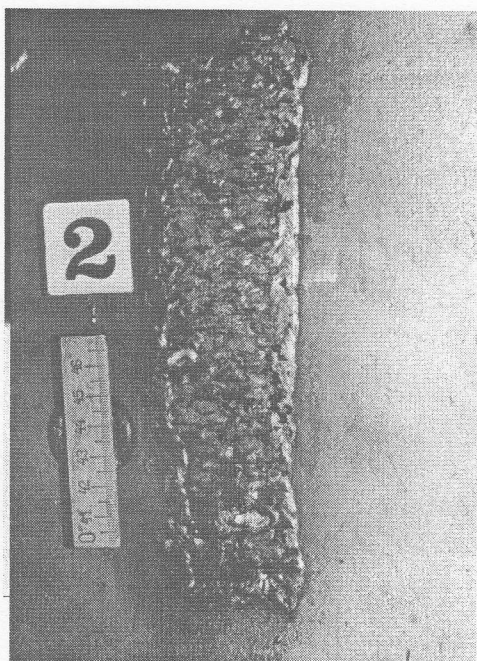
The exemplary places of the pump-turbine rotor covered with padding weld created by IMP 6 electrode.
